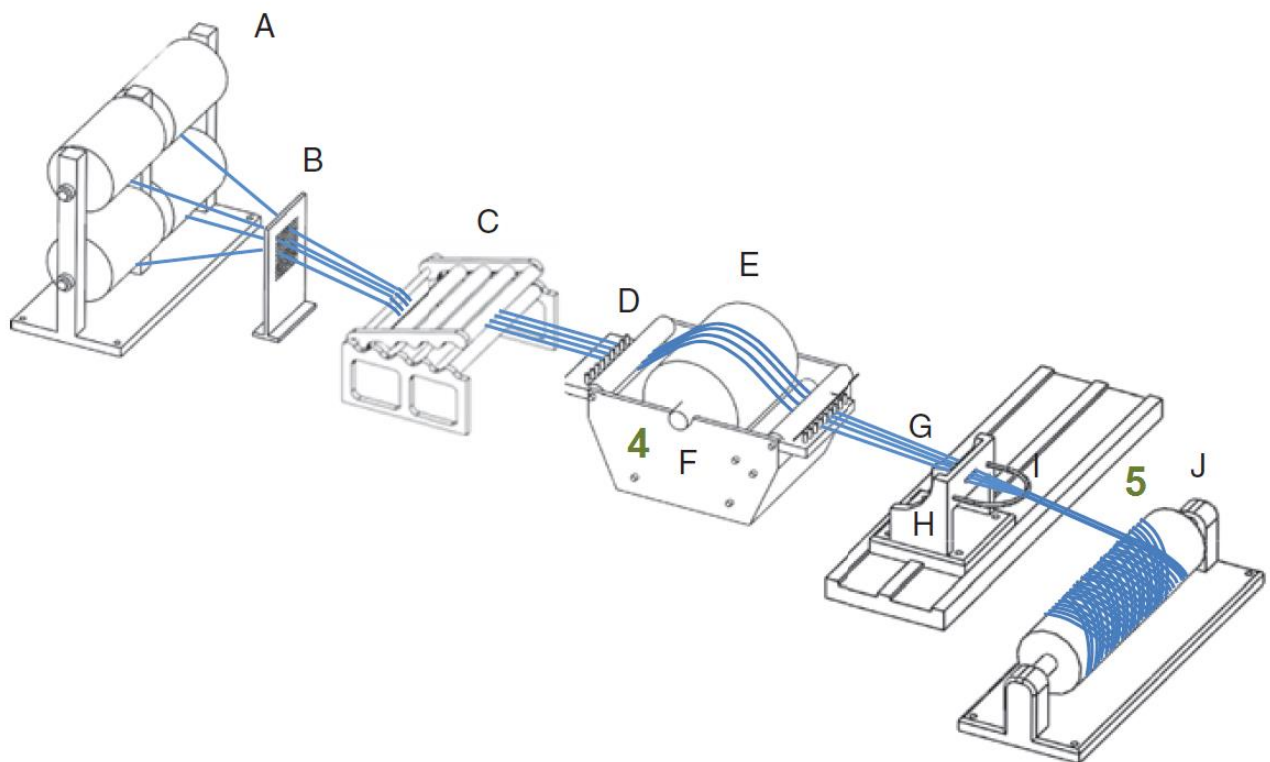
Traditional filament winding. Components are coded as follows: (A) fibre creels; (B) fibre guides; (C) tensioning system; (D) guide pins; (E) drum-impregnator with a doctor blade; (F) resin bath; (G) impregnated fibre bundles; (H) traversing carriage; (I) D-eye; and (J) rotating mandrel. Source: (17)
